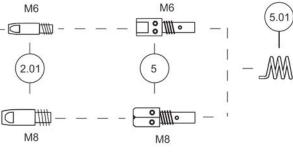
Description Item Order number Туре GN Eco Ø=15mm L=57mm UM Gas nozzle, conical 1.02 394-000369-00000 25 GN Eco Ø=11,5mm L=57mm 1.02 394-001647-00000 Gas nozzle, highly conical UM 25 GN Eco Ø=18mm L=57mm UM 1.03 394-000371-00000 Gas nozzle cylindrical 25 PGD UM 25 1.04 394-000373-00000 Spot welding nozzle 2.01 394-000447-00000 CT Eco M8x30 E-Cu Ø=0.8mm Contact tip 2.01 394-000450-00000 CT Eco M8x30 CuCrZr Ø=1mmContact tip CT Eco M8x30 CuCrZr 2.01 394-000452-00000 Contact tip Ø=1.2mm 2.01 394-000941-00000 CT Eco M8x30 E-Cu Ø=1mm Contact tip 2.01 394-000942-00000 CT Eco M8x30 E-Cu Ø=1.2mm Contact tip 2.01 394-001191-00000 CT Eco M6 E-Cu Ø=0.8mm Contact tip 2.01 394-001228-00000 CT Eco M6 E-Cu Ø=1.0mm Contact tip CT Eco M6 E-Cu Ø=1.2mm 2.01 394-001229-00000 Contact tip CT Eco M6x28 CuCrZr Ø=1mmContact tip 2.01 394-003339-00000 CT Eco M6x28 CuCrZr 2.01 394-005224-00000 Contact tip Ø=1.2mm CT Eco M6x28 CuCrZr 2.01 394-005407-00000 Contact tip Ø=0.8mm CT Eco M8x30 CuCrZr 2.01 394-014024-00000 Contact tip Ø=0.8mm CT Eco M6x28 E-Cu Ø=0,8mm 2.01 394-016105-00000 Contact tip, aluminium welding Alu CT Eco M6x28 E-Cu Ø=1,0mm 2.01 394-016107-00000 Contact tip, aluminium welding Alu CT Eco M6x28 E-Cu Ø=1,2mm 2.01 394-016108-00000 Contact tip, aluminium welding Alu CT Eco M8x30 E-Cu Ø=0,8mm 2.01 394-016115-00000 Contact tip, aluminium welding Alu CT Eco M8x30 E-Cu Ø=1,0mm 2.01 394-016117-00000 Contact tip, aluminium welding Alu CT Eco M8x30 E-Cu Ø=1,2mm
